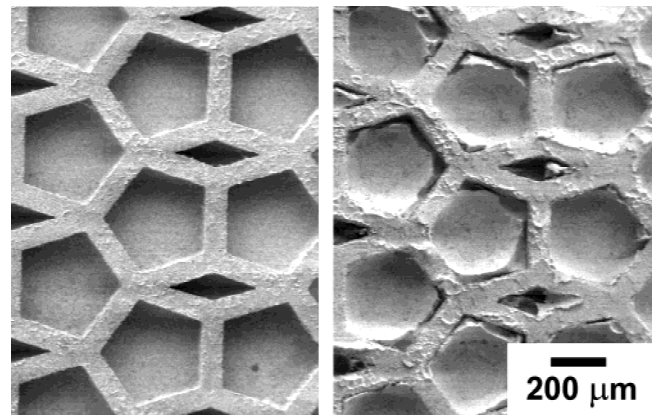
SEM micrographs showing a core structure—periodic Durer's pentiling—without (left) and with (right) the excess solder in the core (only one face sheet attached).
